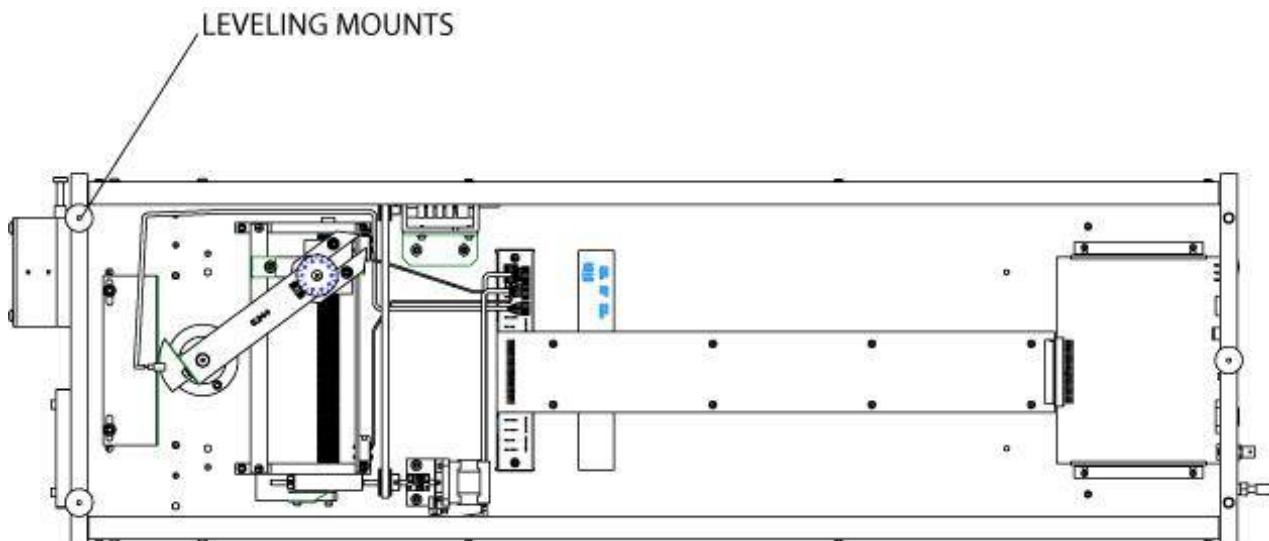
Bottom View of 1000M Showing Mounting-Hole Locations
